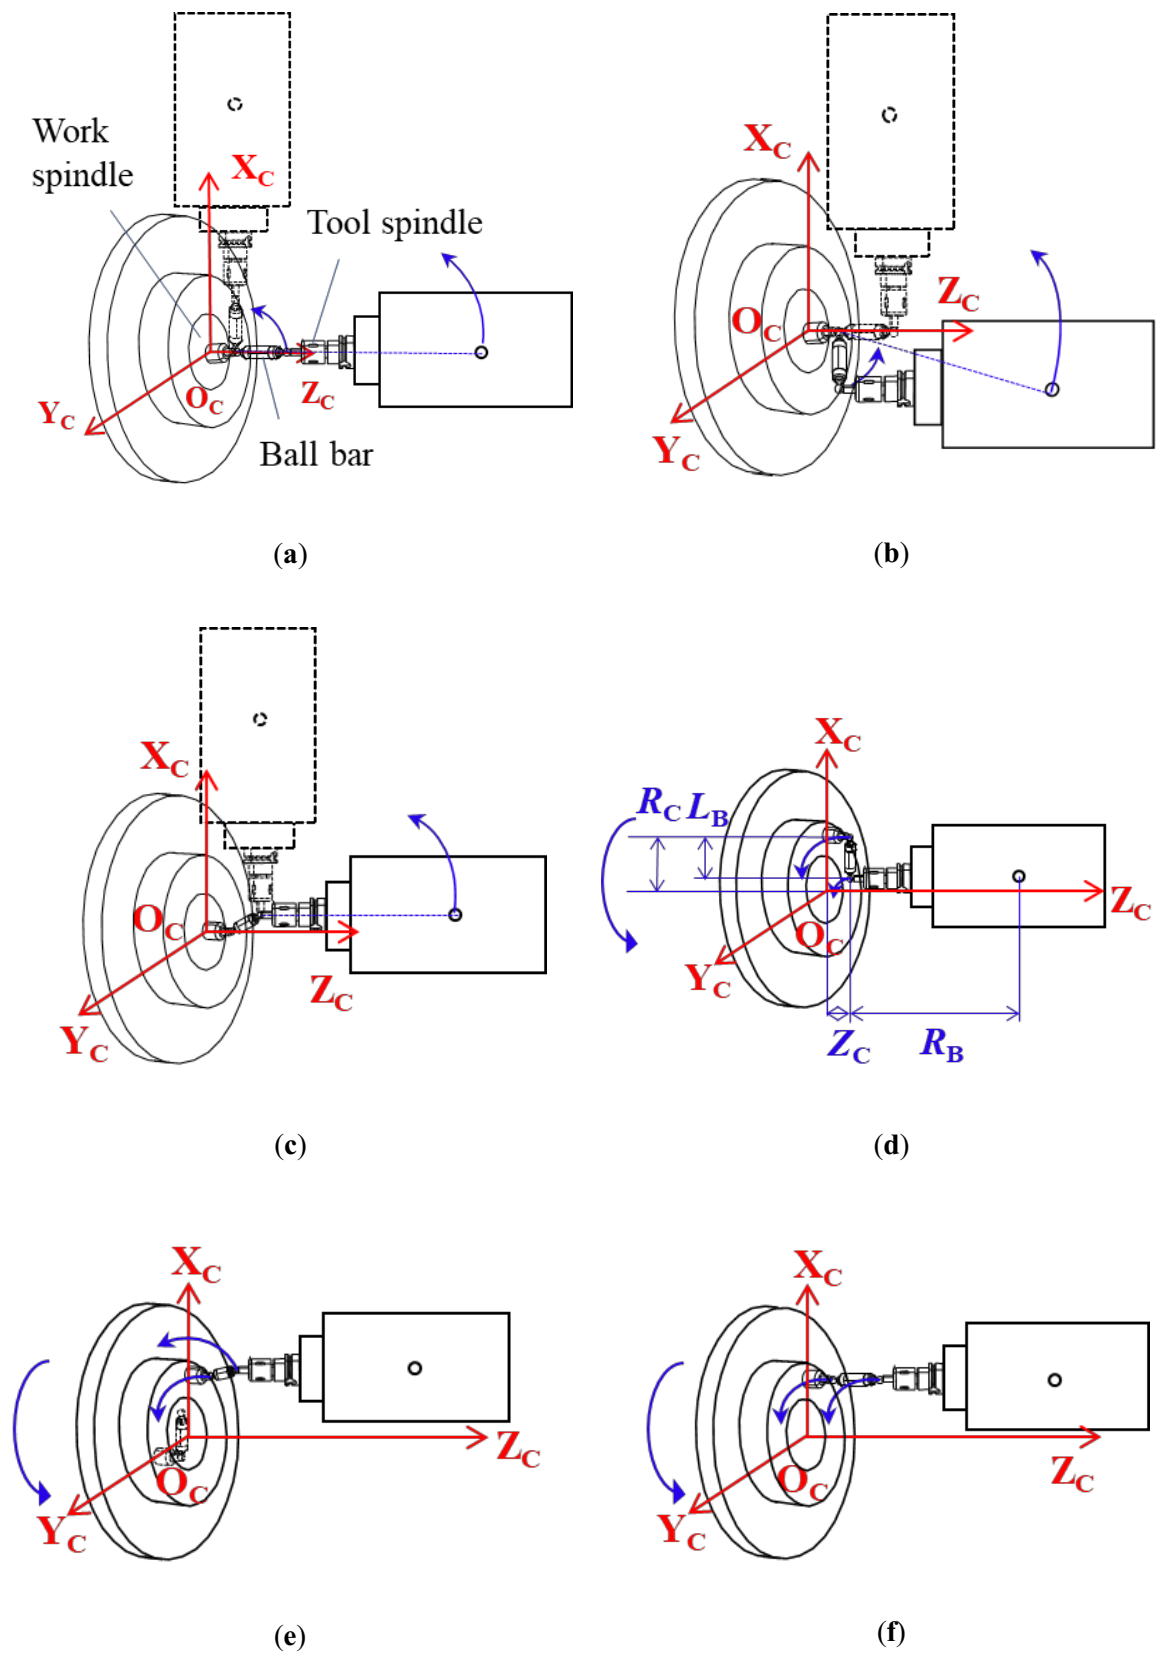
(a) B axis radial measurement; (b) B axis tangential measurement; (c) B axis axial measurement; (d) C axis radial measurement; (e) C axis tangential measurement; (f) C axis axial measurement.
